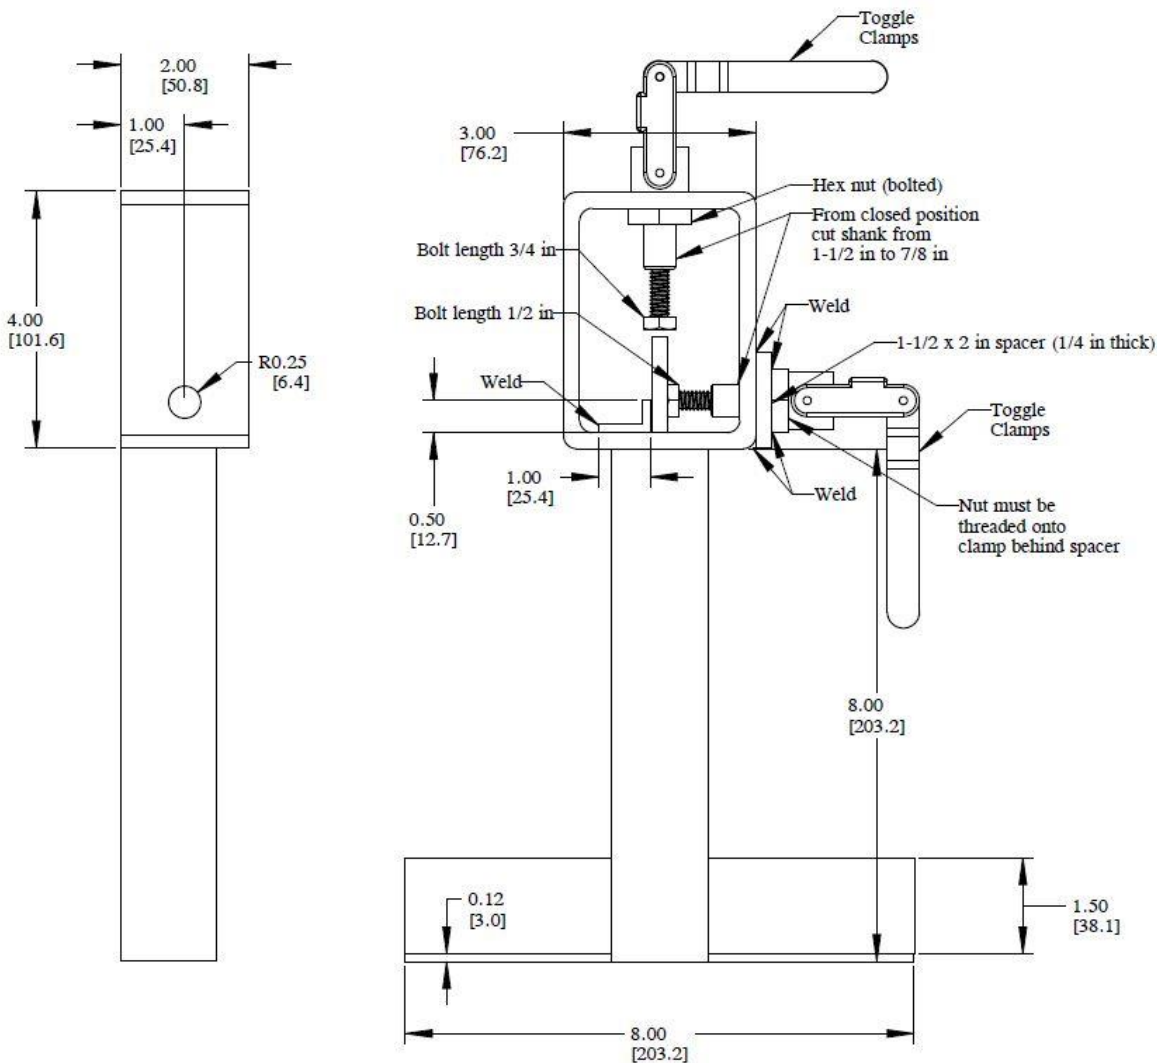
Magnesium Alloy Test Sample Mounting Stand and Holder (Side)
